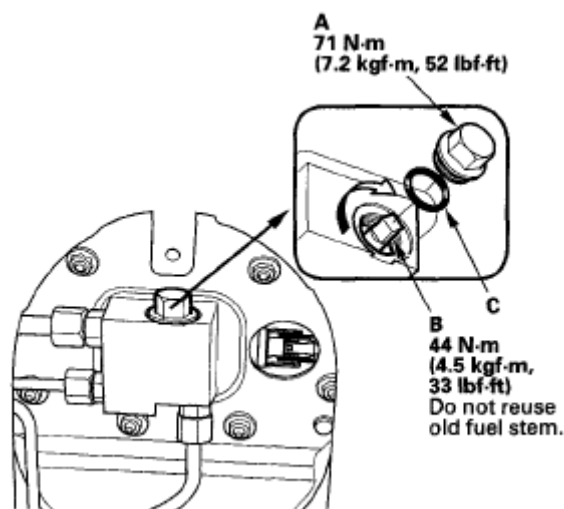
Identifying Sealing Bolt And Fuel Stem With Torque Specifications
